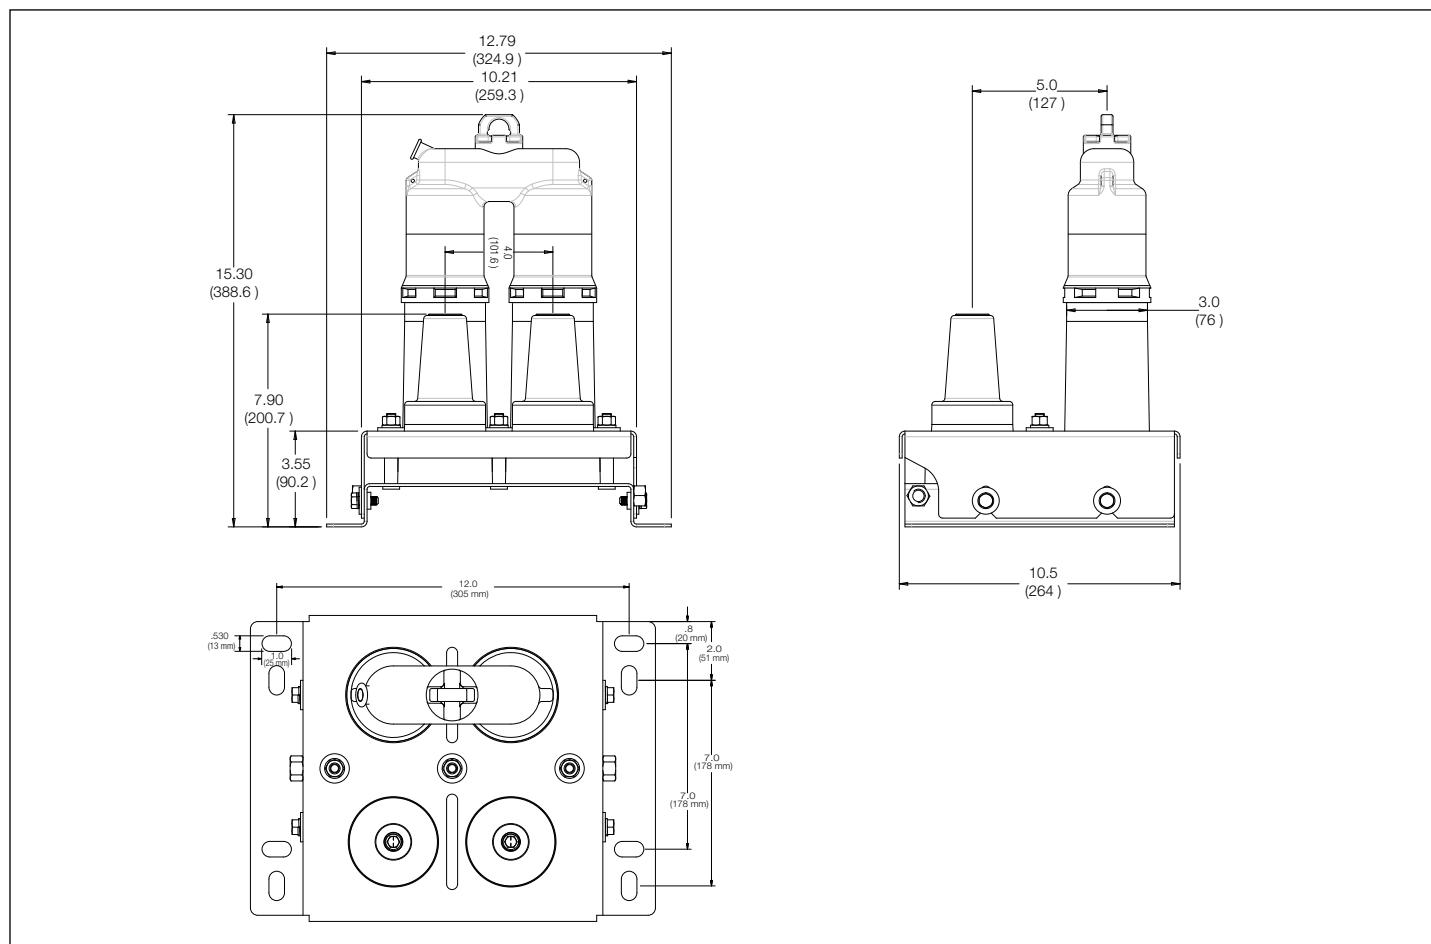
Cleer loadbreak connector assembly (square stainless steel bracket)
